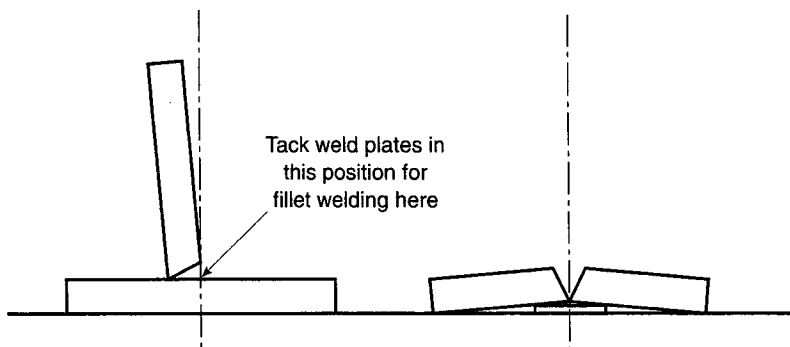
Preset geometry to account for the distortion of a fillet weld (left) and butt weld (right).
